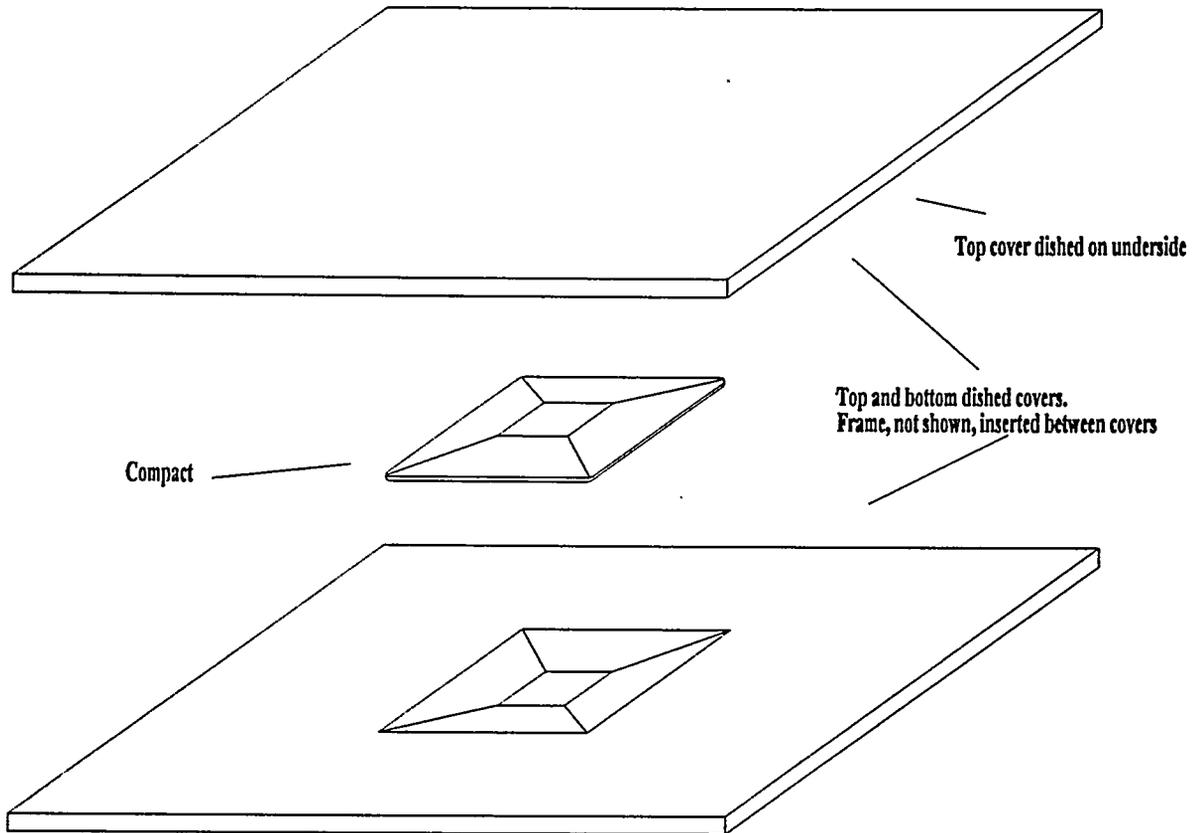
Clamshell design for compact/cover plate assembly.
